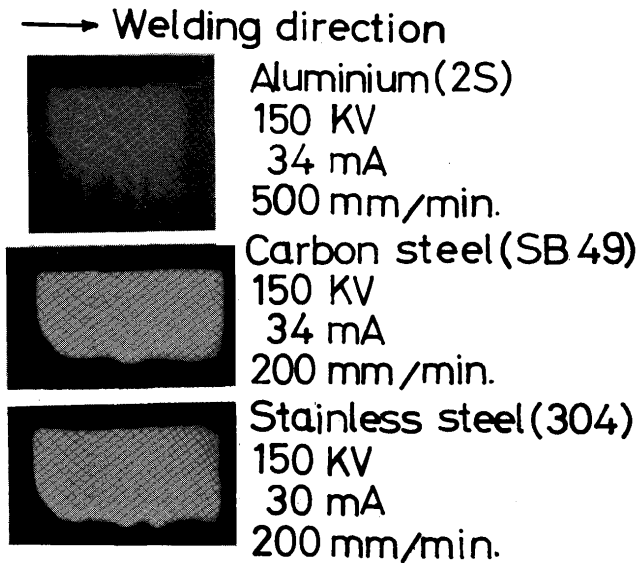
Some examples of weld penetration shape on X-ray film which were photographed by the pin hole camera.
